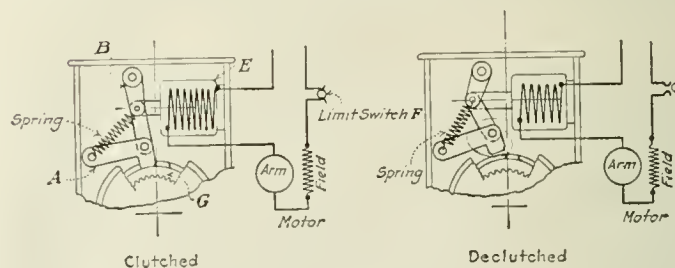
SKETCH SHOWING PRINCIPLE OF OPERATION OF A SECOND TYPE OF VALVE-CONTROL UNIT
